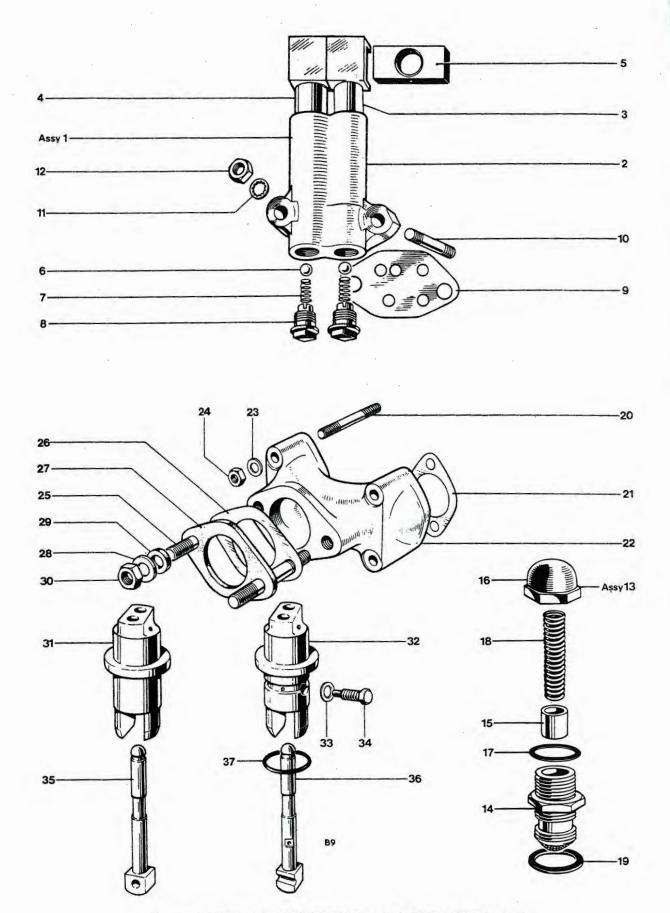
OIL PUMP, RELEASE VALVE, MANIFOLD AND TAPPETS
